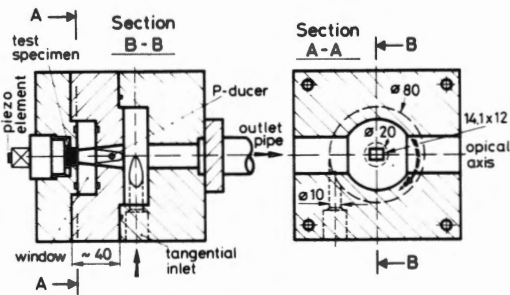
Side and top views of the test section of the CVG (all the dimensions are in mm).
